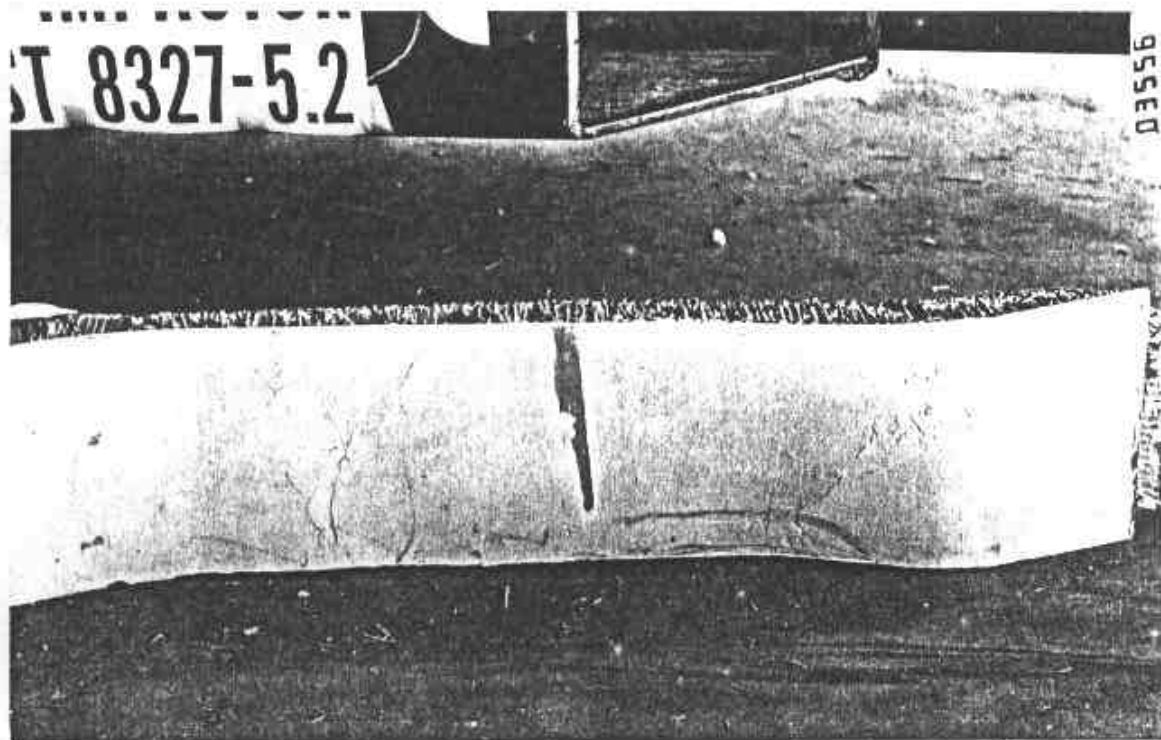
Area of Bond Failure on Back of Bumper (Test 8327-5.2).
